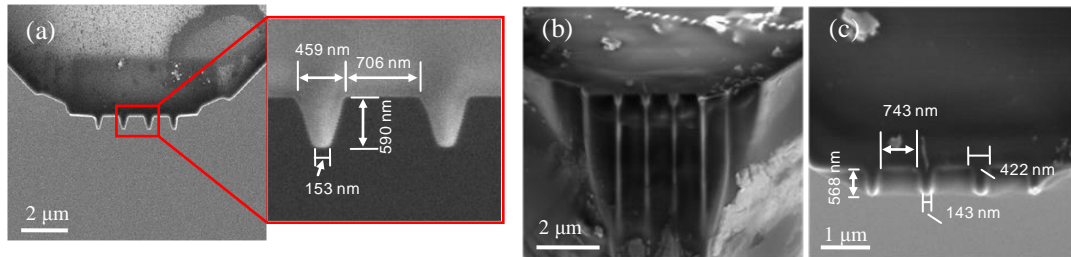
SEM images of the nanoscale multi-tip diamond tool. (a) SEM image of the tool before cutting; (b) SEM image of the tool cutting edges after cutting; and (c) a close up view of the shape of tool tips after cutting.
